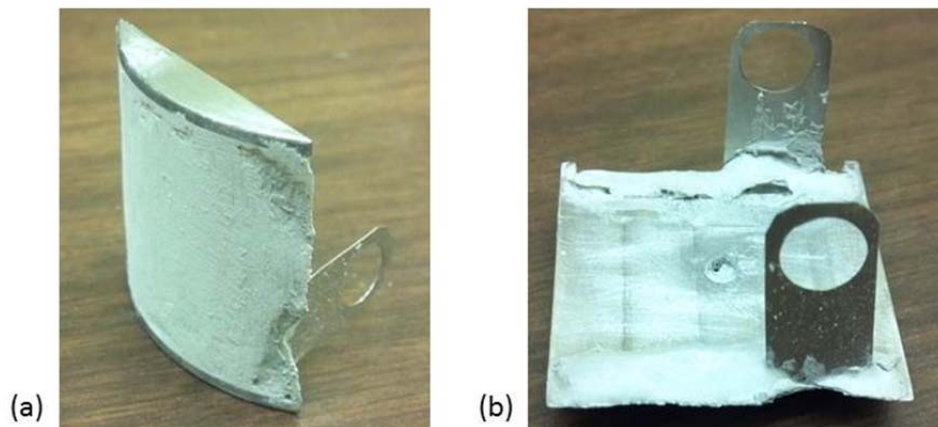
Finished heater pictures: (a) front/side view showing heater surface area, (b) back side of heater showing lead connectors.
